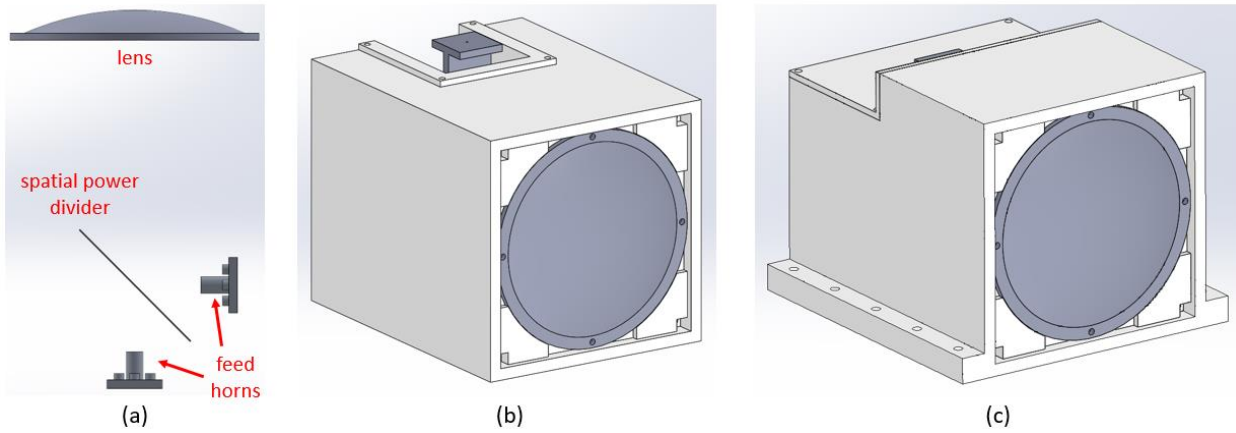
Images of the 3D software model of the J-band antenna components. (a) Relative positions of the feed horns, spatial power divider, and lens. (b) Components assembled inside the early housing. (c) Components assembled inside final housing.
